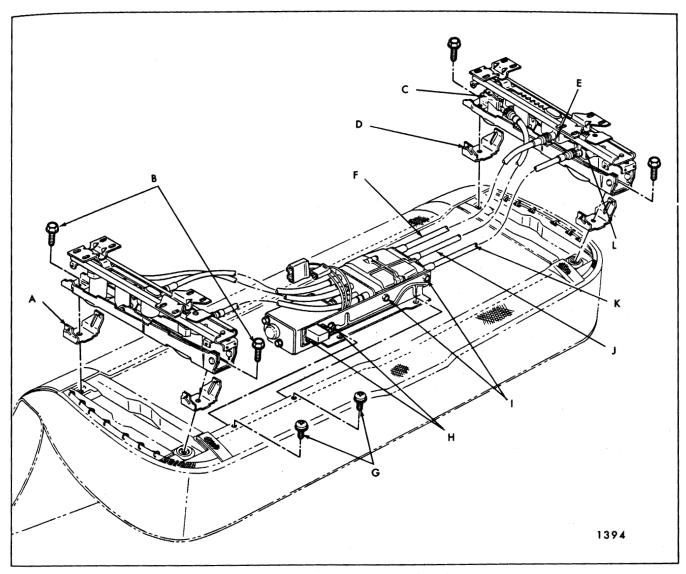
Front Seat Assembly - Six-Way - "B & C" Styles
